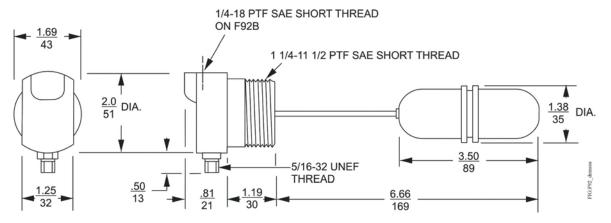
F92 Series Air Volume Control for Shallow Wells Dimensions, in. (mm)
